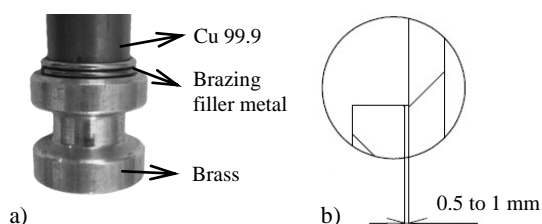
Brazed components of solar collectors, a) copper tube and brass flange, b) brazing clearance
